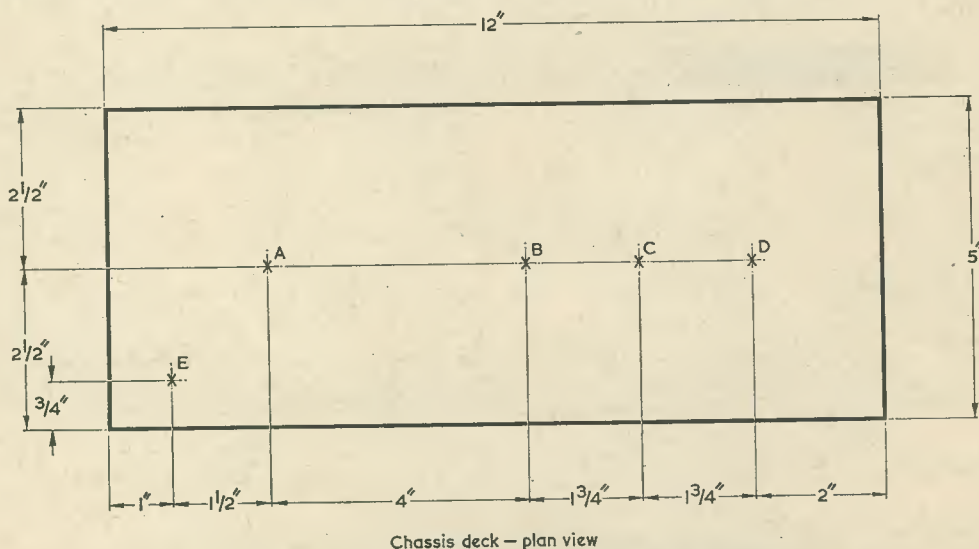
Drilling details of the chassis deck — this being the speaker unit front panel when completed. Hole A is for the 3in. speaker and holes B, C and D are for the 7in. x 4in. speaker
